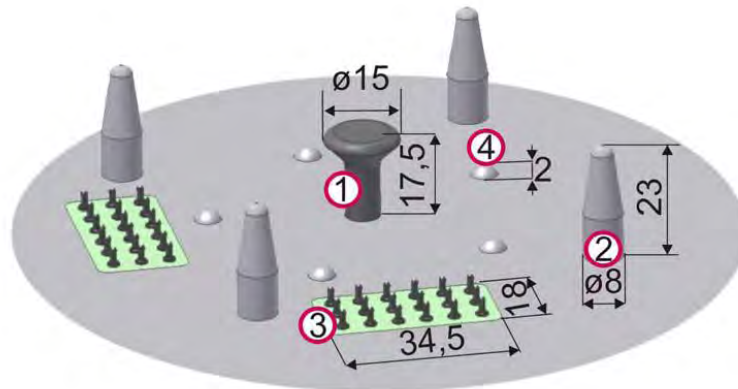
Passive connector of latch mechanism installed in RIMRES project robots Sherpa and CREX [34]. (1) Bolt for latch, (2) Dome shaped counter pin, (3) Contact block, (4) Distance pins.
